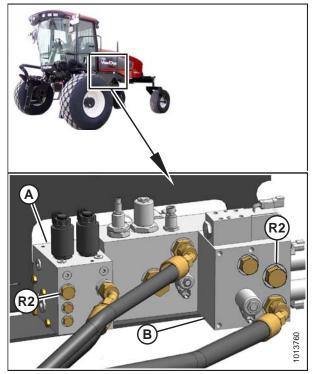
Valve Blocks with Reverser Valve in Factory Configuration
